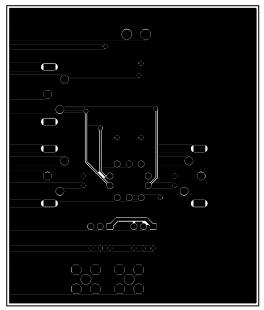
PCB Drawing Layer 2 (Bottom Layer)
